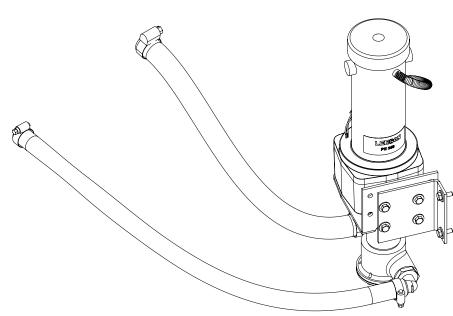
Automatic Pump Out (APO) Kit Assembly 000-079-001 Rev. E
